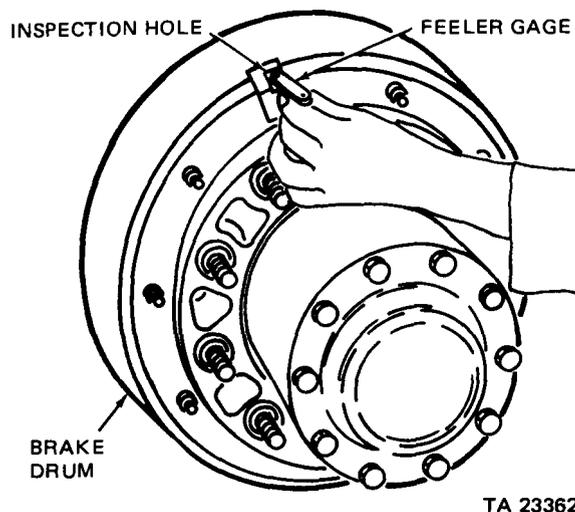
Checking brake lining clearance with feeler gage (Model M127)
